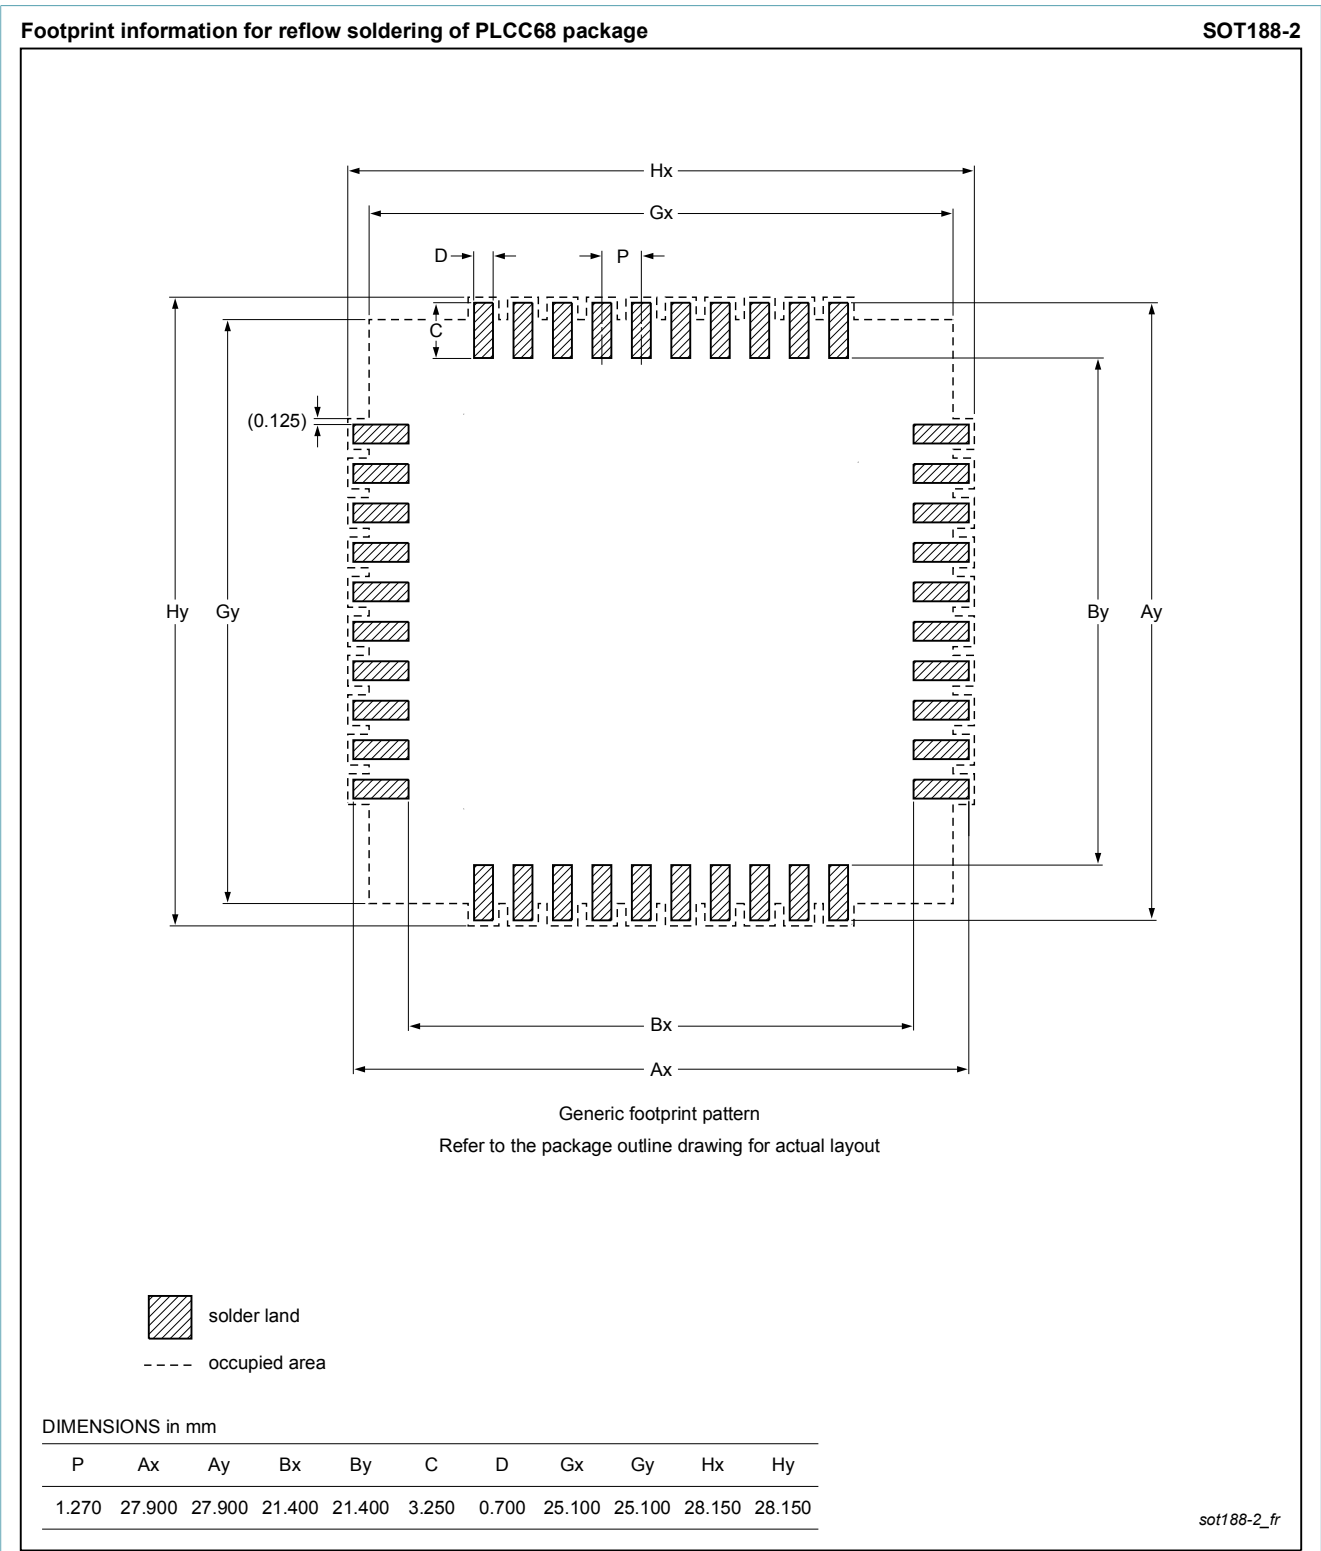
Reflow soldering footprint for PLCC68 (SOT188-2)
